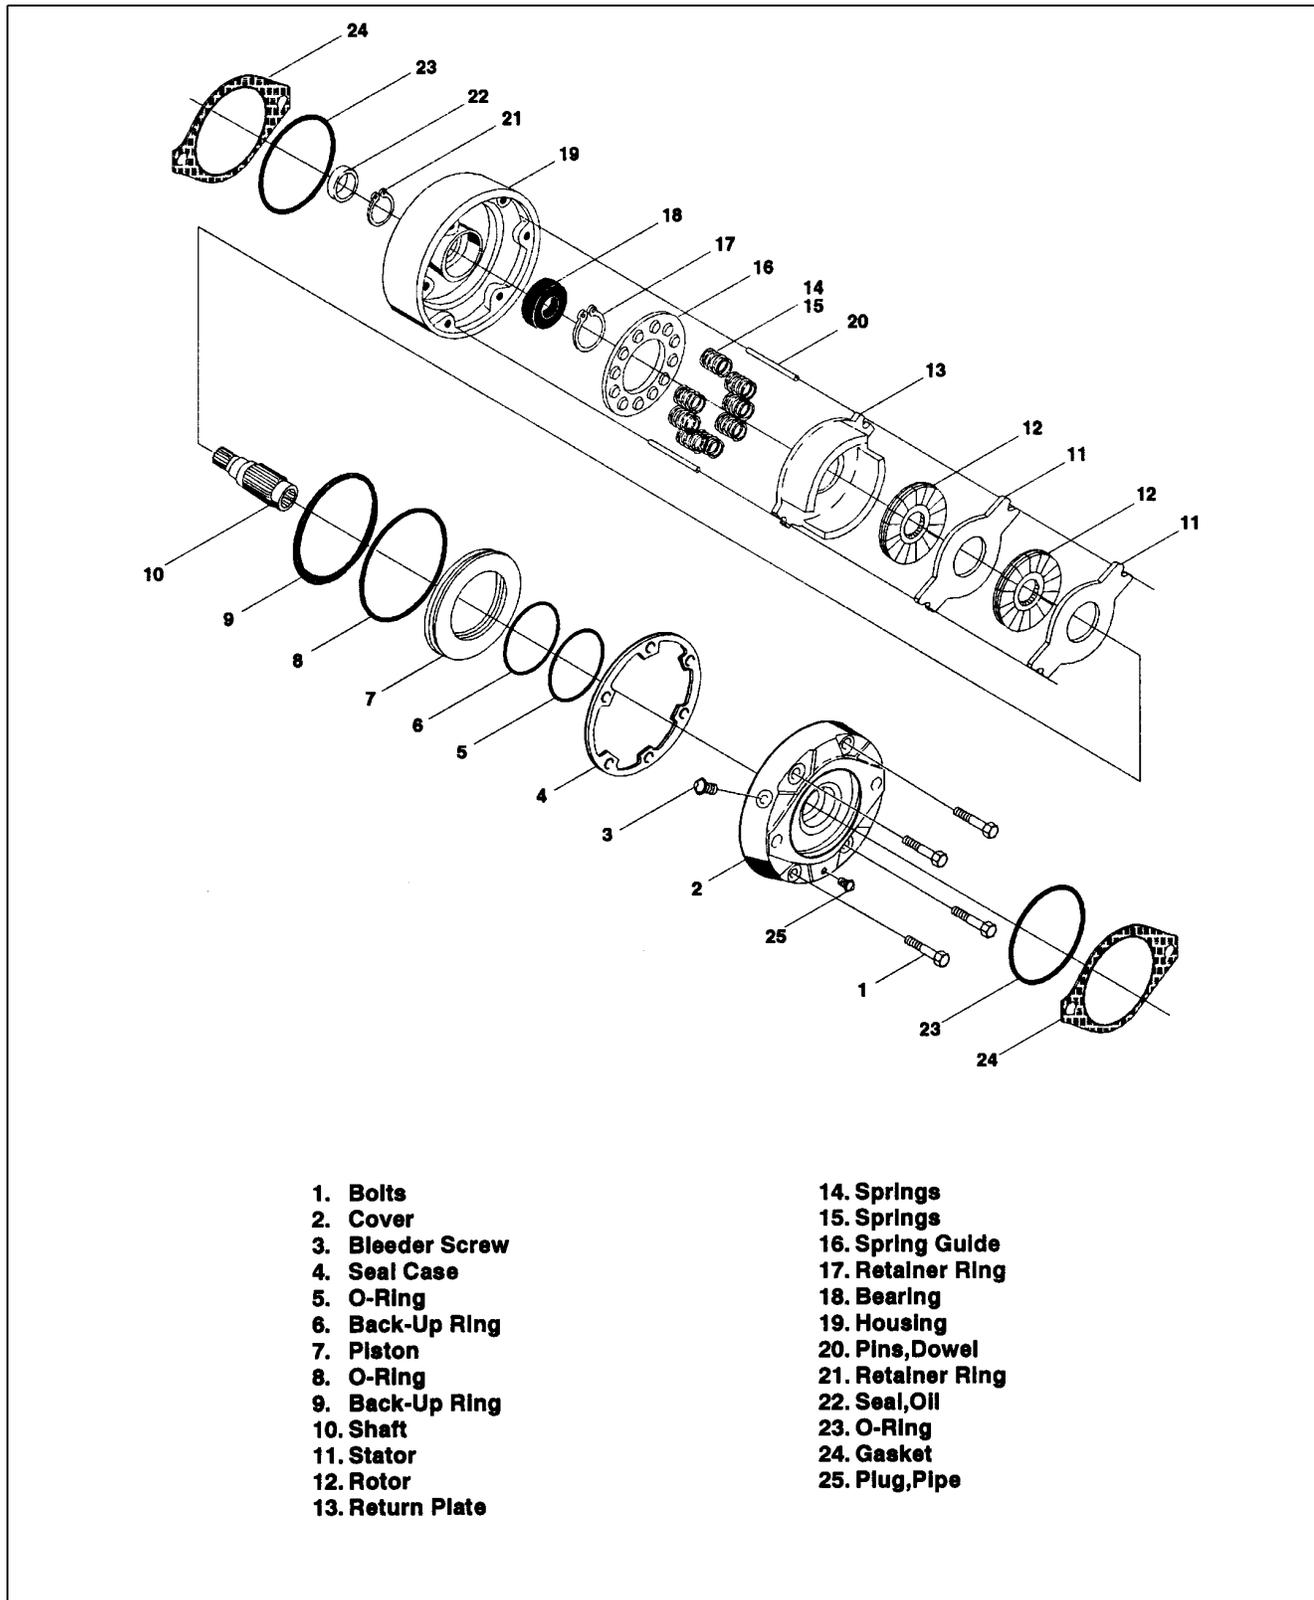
Drive Brake, Mico. (Machines Built From S/N 33476 To Present)
